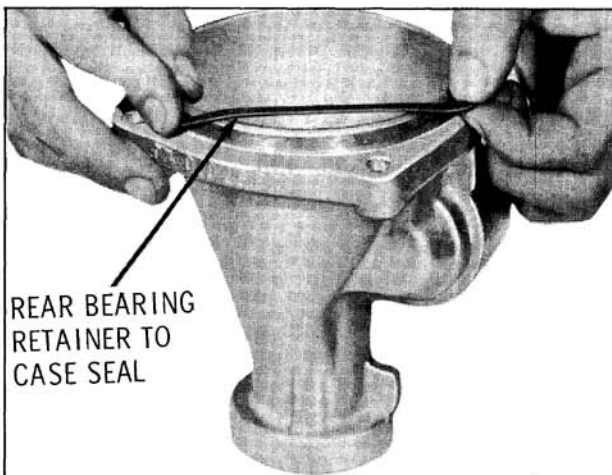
Removing Rear Bearing Retainer to Case Seal
